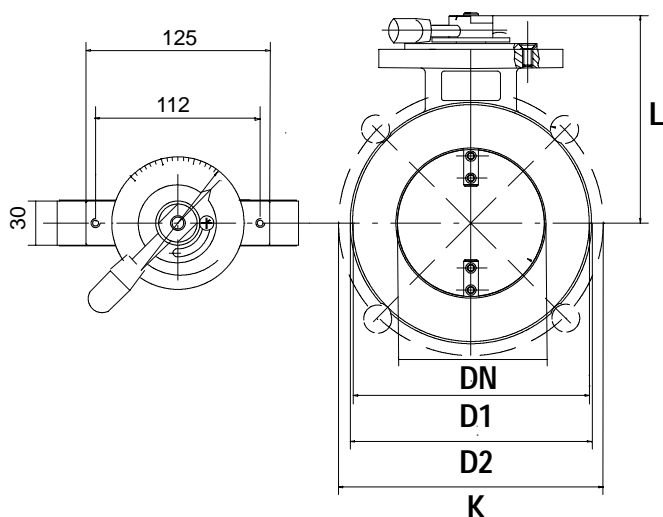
Dimensional drawing VF5000A3/R3 Series
